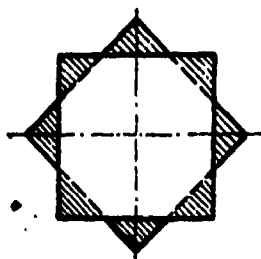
The instant of exposure of peripheral portions of the cross section during welding of two specimens having a square cross section.
